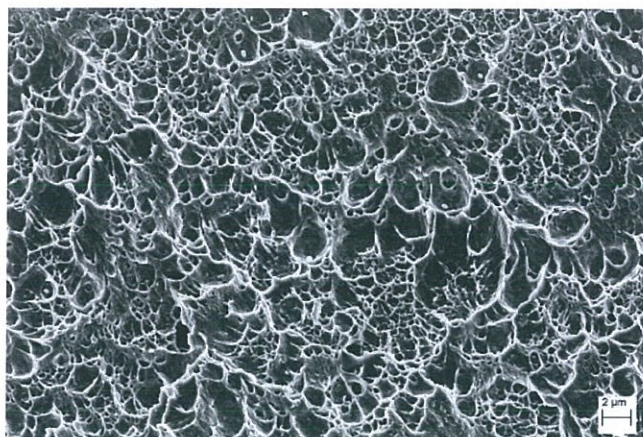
Fracture surface of a screw after overtightening (ductile fracture)
